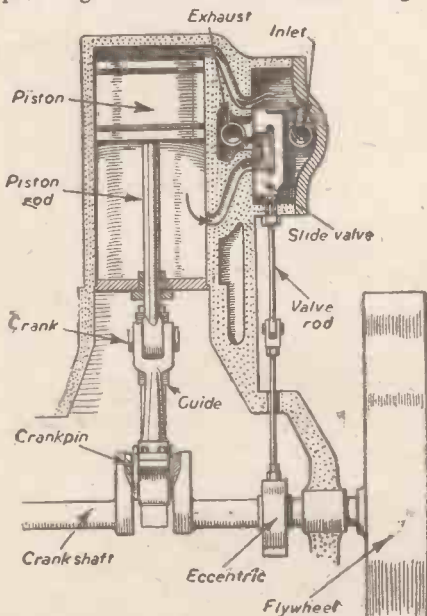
Section of a single-cylinder vertical steam engine, showing the chief working parts.
